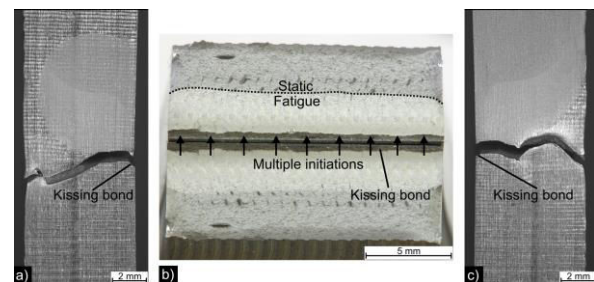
The fatigue fracture initiation from the KB flaw: a) left side view; b) fracture surface with multiple initiation form; c) right side view.
